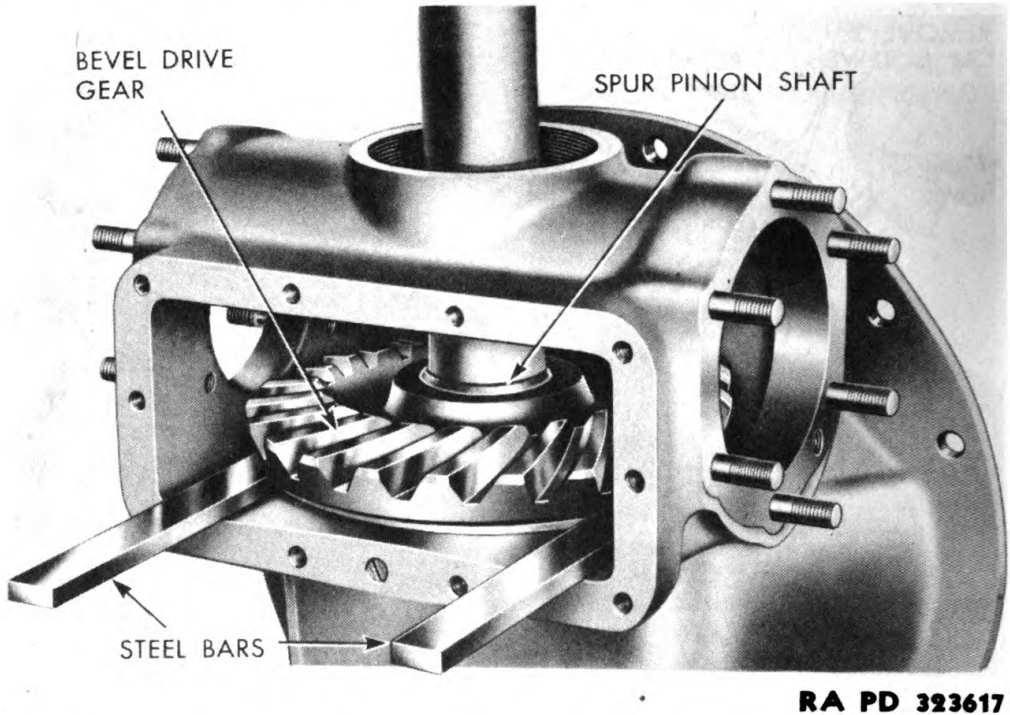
Pressing Spur Pinion Shaft From Bevel Drive Gear
